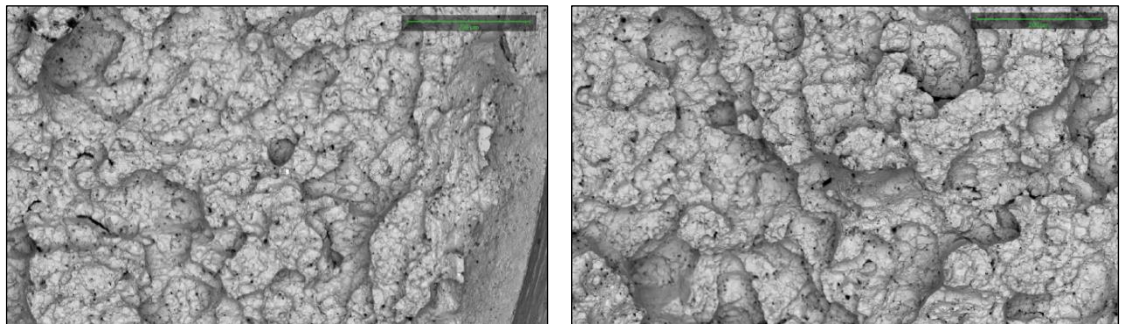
Fracture surface of the sample without coating. Visible ductile fracture.
